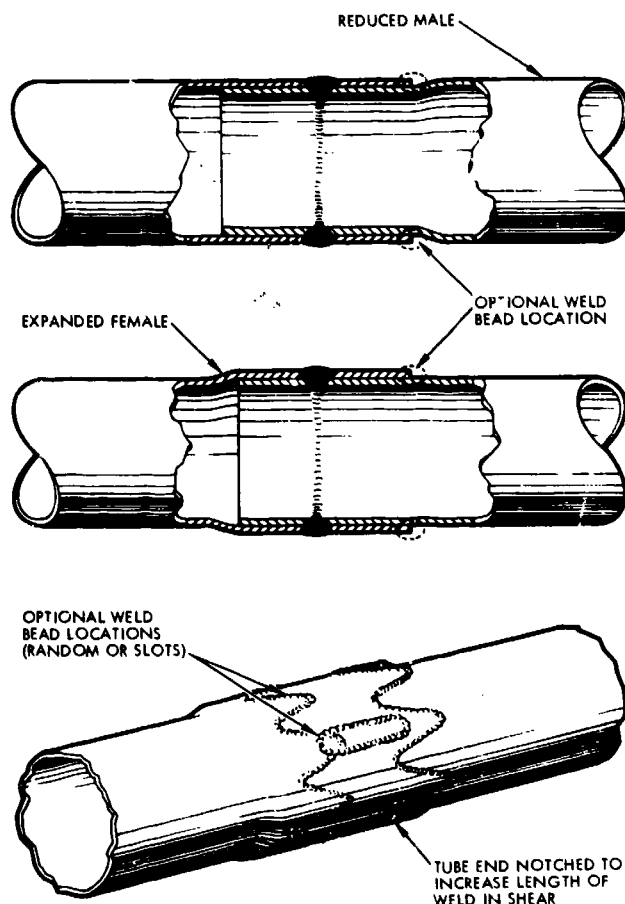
Plain Lap Weld Joints for Tubing
